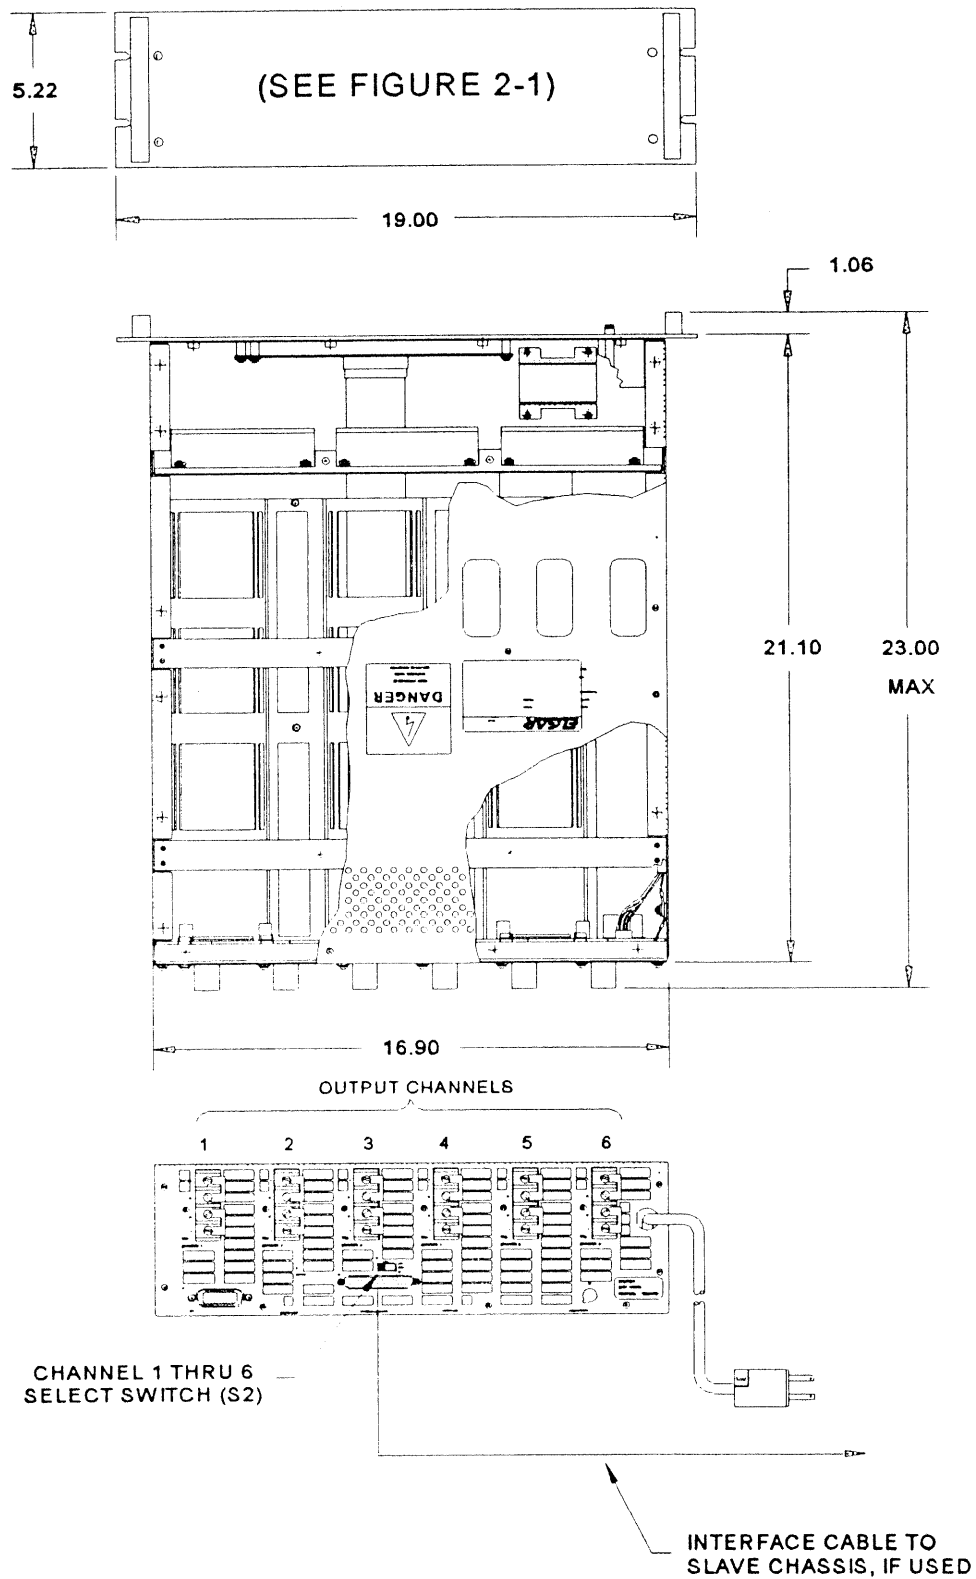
Model AT8000B MASTER Chassis Configuration Outline Drawing
